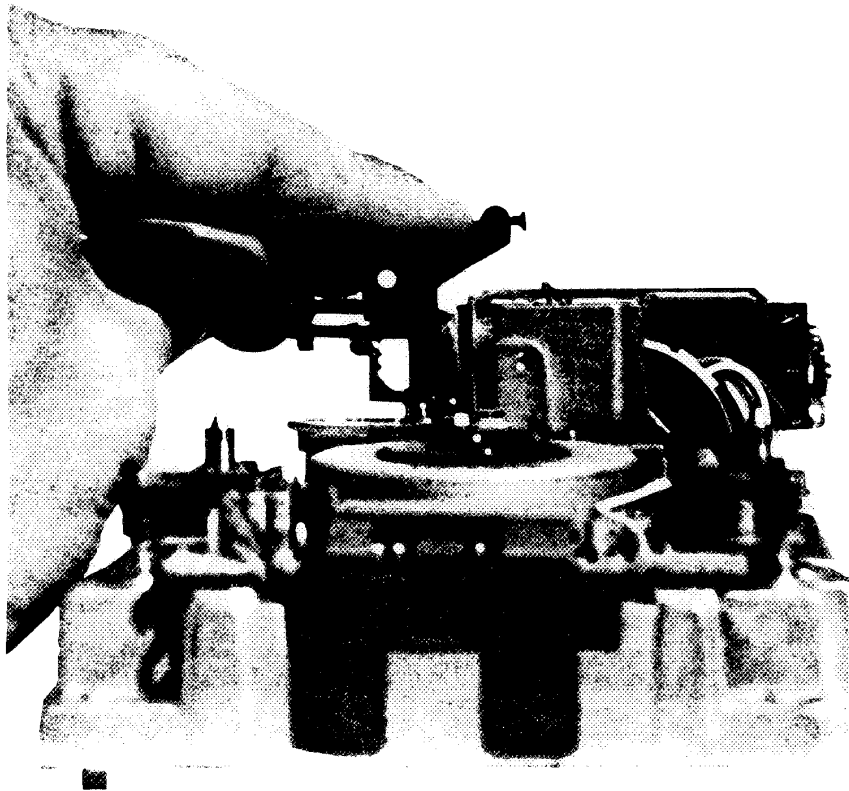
For easy access to the 400K drive head, pull back the pressure pad assembly.
